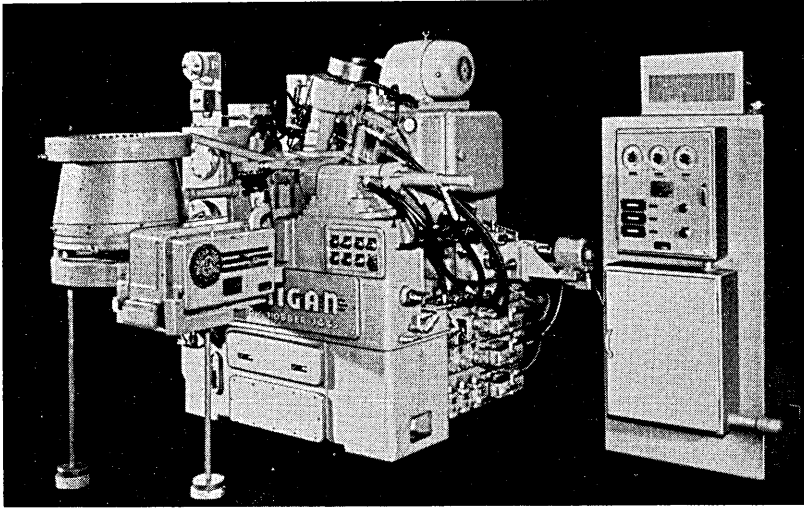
Completely automated gear production setup (Courtesy Michigan Tool Co.)
